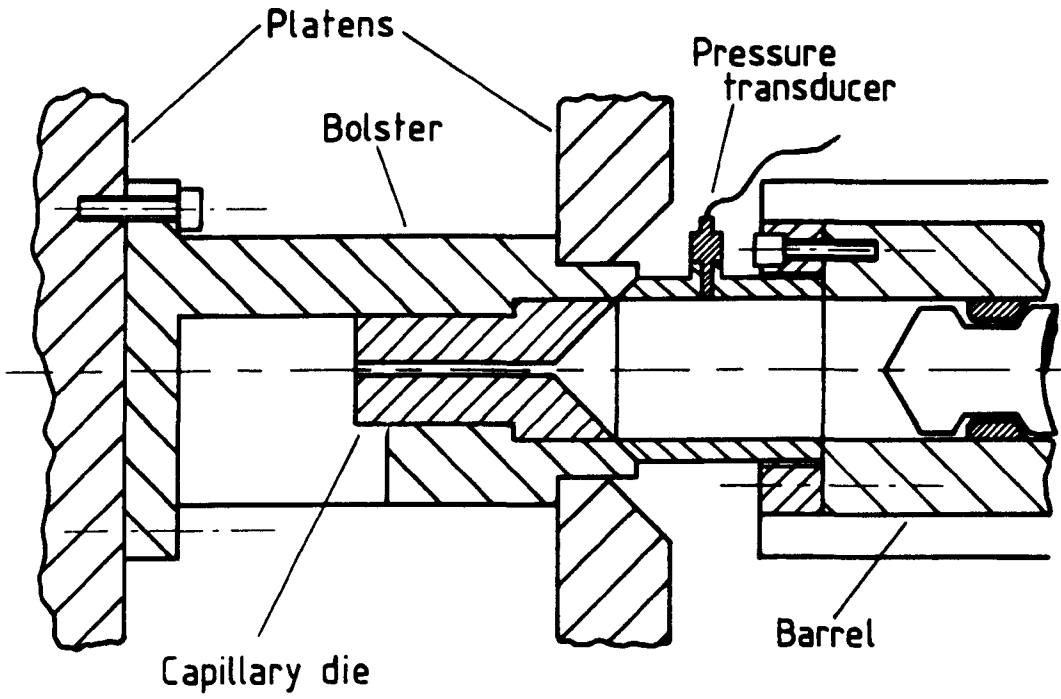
Diagram of the rheometer head used in conjunction with the injection moulding machine.
